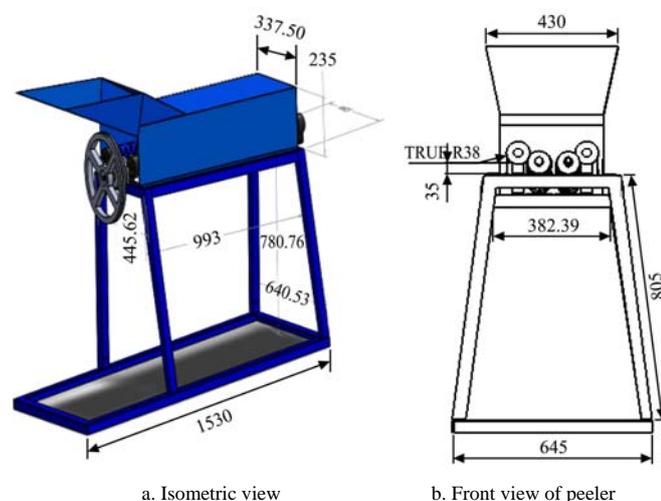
Isometric view and front of the maize peeling machine (All dimension are in mm)
